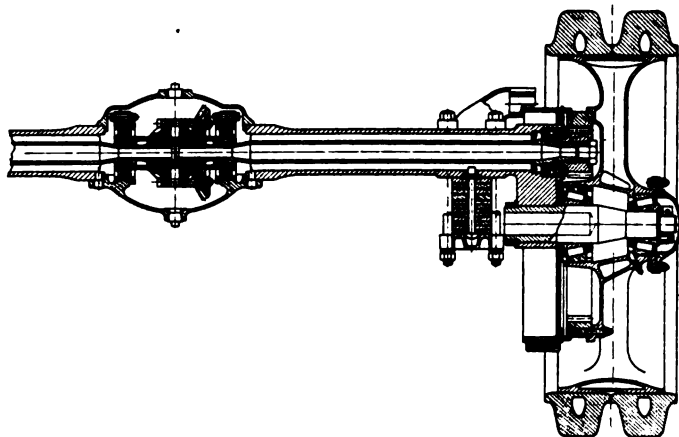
SECTIONAL DRAWING OF THE TYPE-L AXLE
